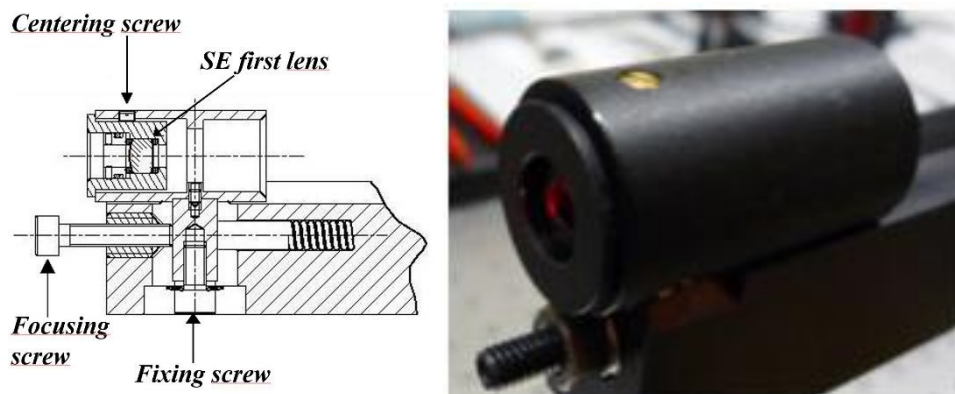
mount of the first SE lens. On the left the mechanical drawing of the mount. The lens can be focused using a preloaded screw, while three screws (only one is shown in this image) allows tip-tilt and centering tuning. On the right a picture of the mount.
